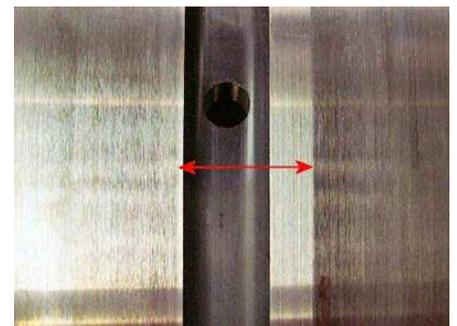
Spherical roller bearing's outer ring's external surface for non-locating (axially free) bearing. The oil lubrication groove position is sharply marked, which shows that the bearing ring has not been moving axially in the housing bore as it should have been.
